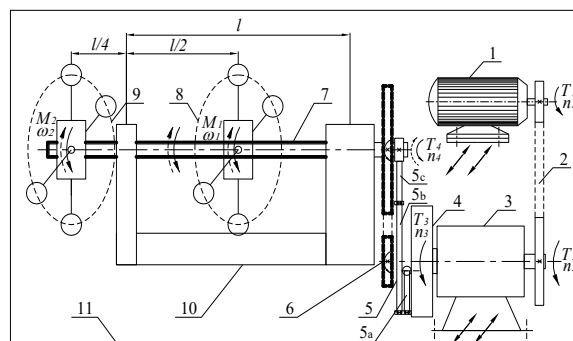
Kinematic scheme of the tested shaft installed on the experimental test rig [19]: 1 – electric motor; 2 – V-belt transmission; 3 – kinematic transforming mechanism (KTM); 4 – flange with shaft supported in the KTM; 5 – four-bar linkage; 6 – timing-belt transmission; 7 – tested shaft; 8, 9 – adjustable loading masses; 10 – supporting frame; 11 – base.
